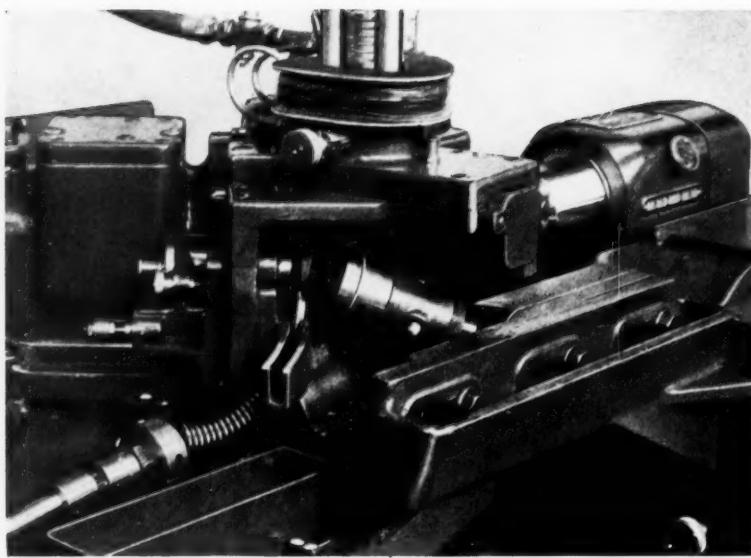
The Beveled Surface of Valve-seat Inserts for Automobile Cylinder Blocks is Finish-ground at Production Rates up to 180 Pieces an Hour
